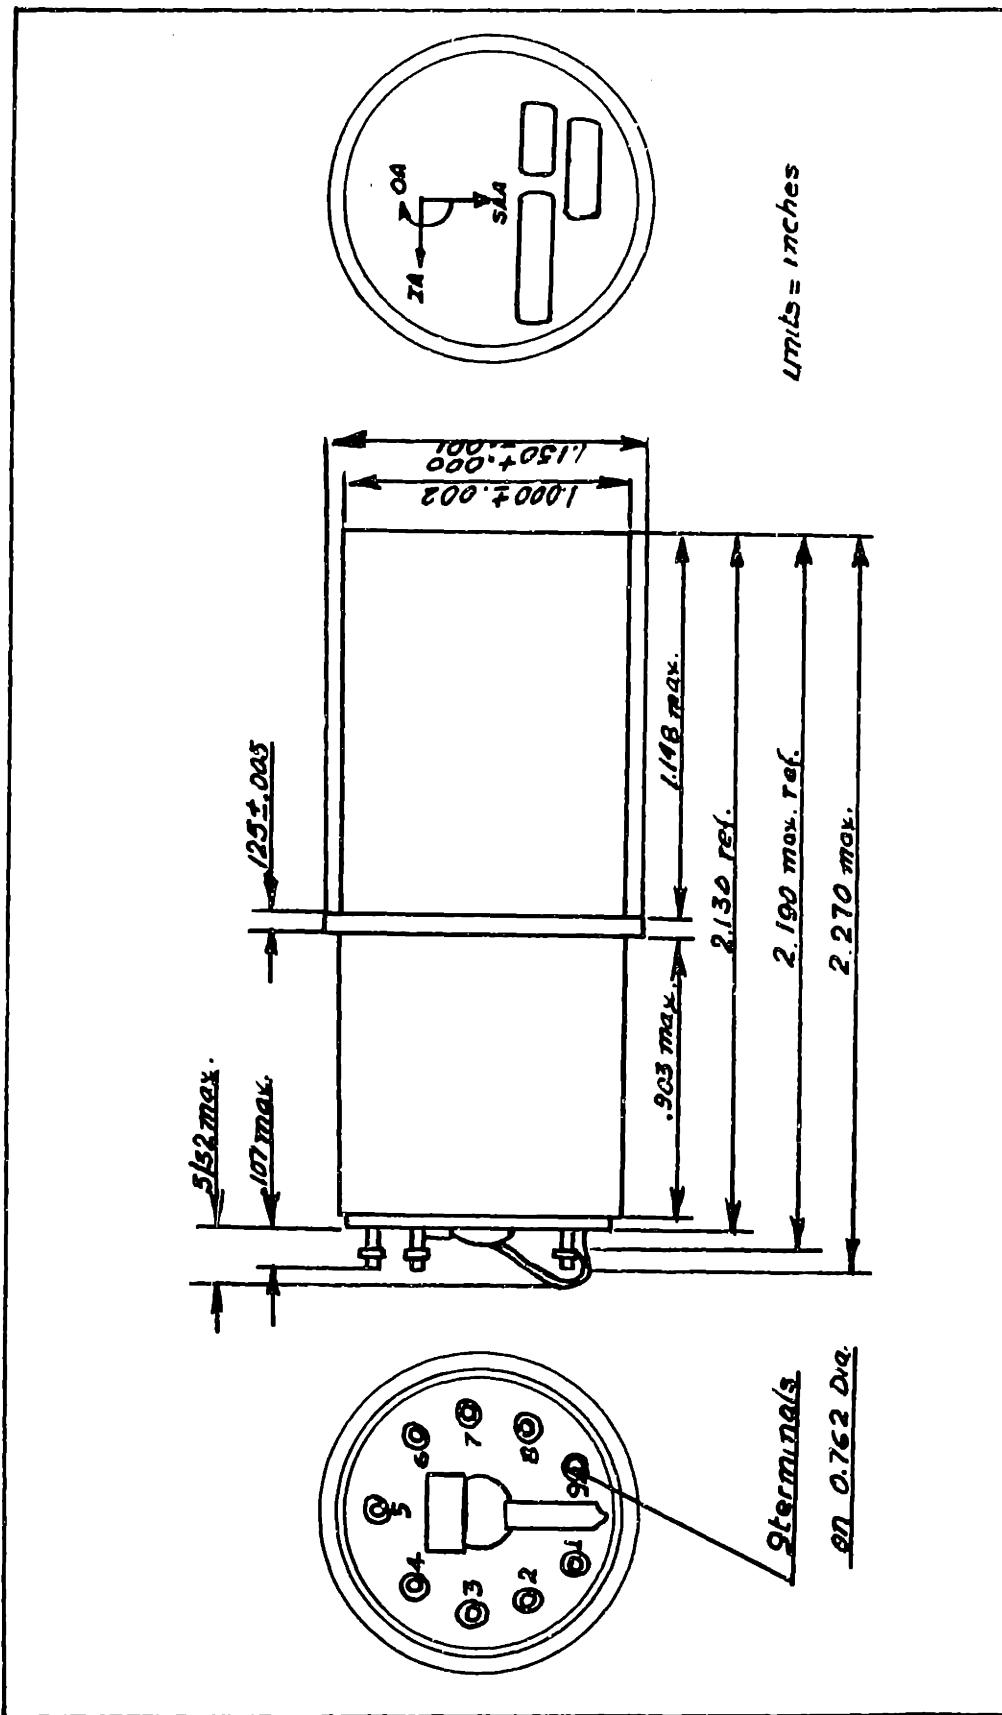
Mini RIG-30 Outline Dimensions
